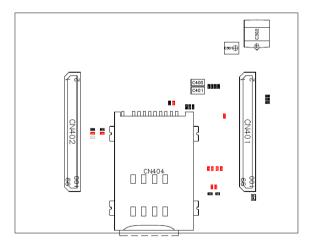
Default Soldering Configuration for Jumpers for the SL501x Socket Board (Bottom View)
